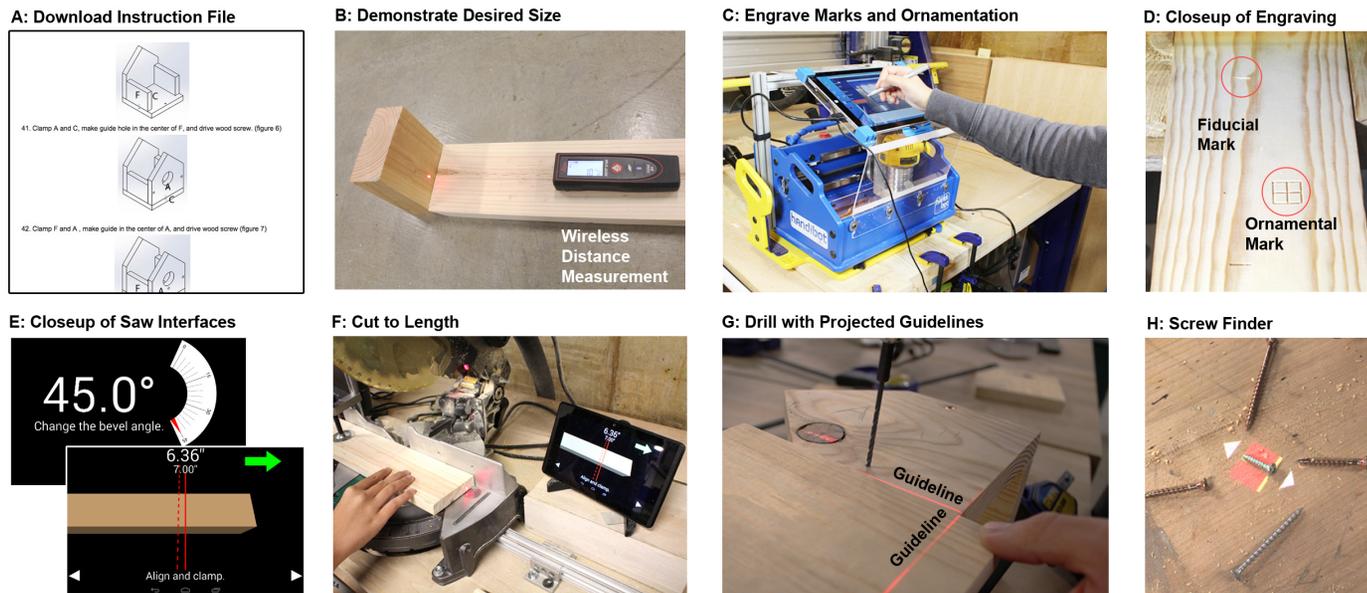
To complete a Drill Sergeant project, a user finds a model (a) and sizes it, measuring their desired final location (b). For this birdhouse, the user engraves a decorative pattern and fiducials (c, d), cuts boards to length (e, f), locates drill positions (g), and identifies the correct fasteners (h).
